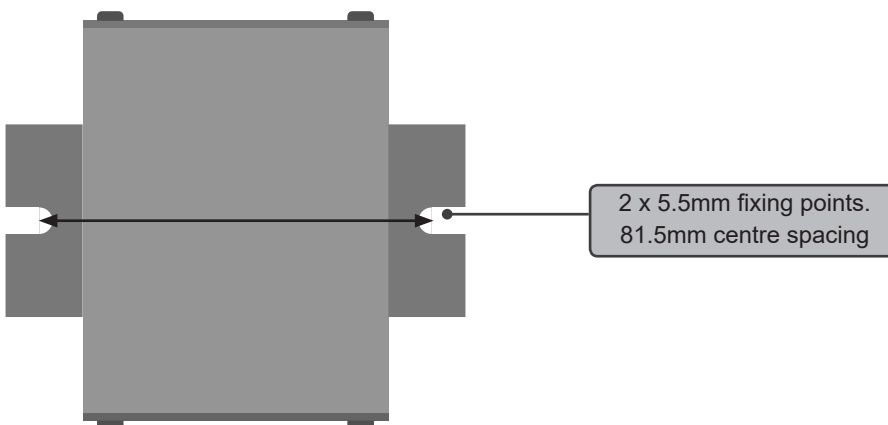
GNSS decoder enclosure mounting dimensions
